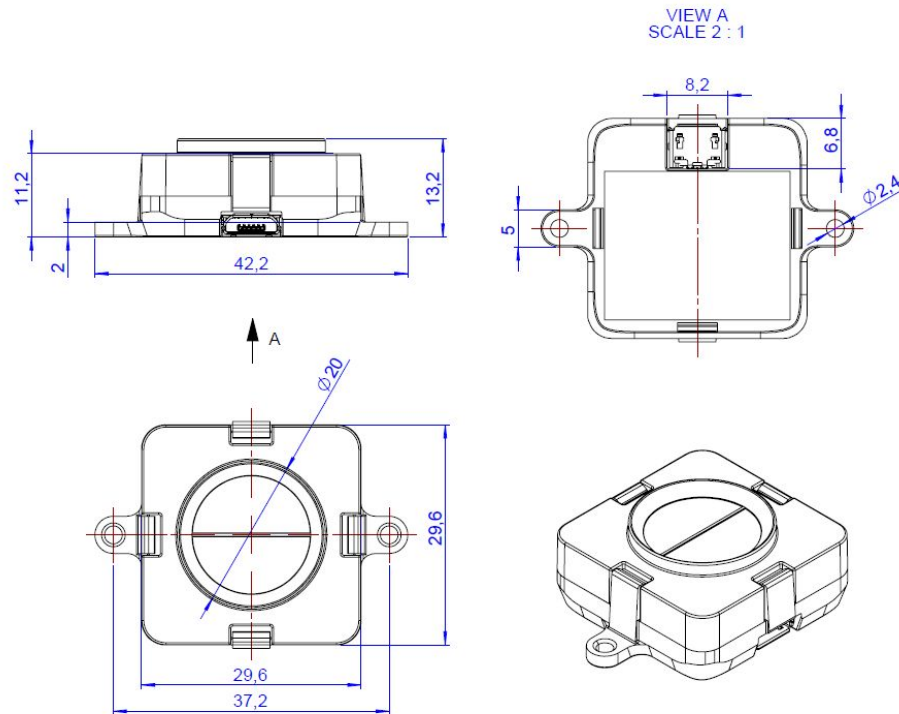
TeraRanger Evo Mini external dimensions, USB backboard
